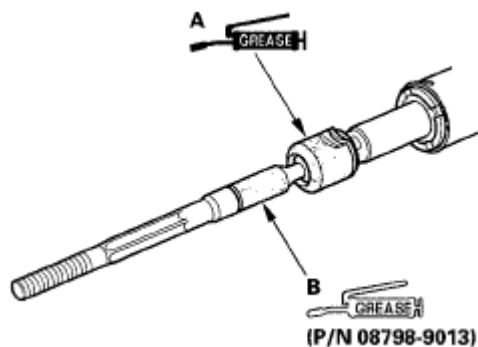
Identifying Multipurpose Grease To Circumference Of Rack Joint Housing
